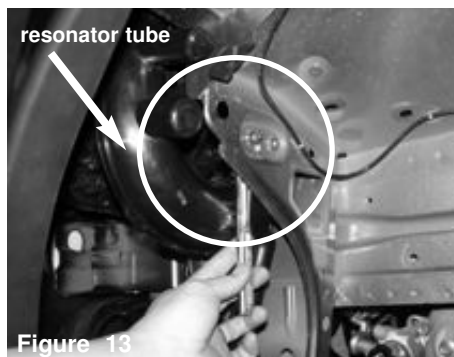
Once the wheel well cover is moved back, you can access the intake resonator tube inside the front bumper cavity. Remove the 10mm bolt attaching the resonator tube to the frame.
